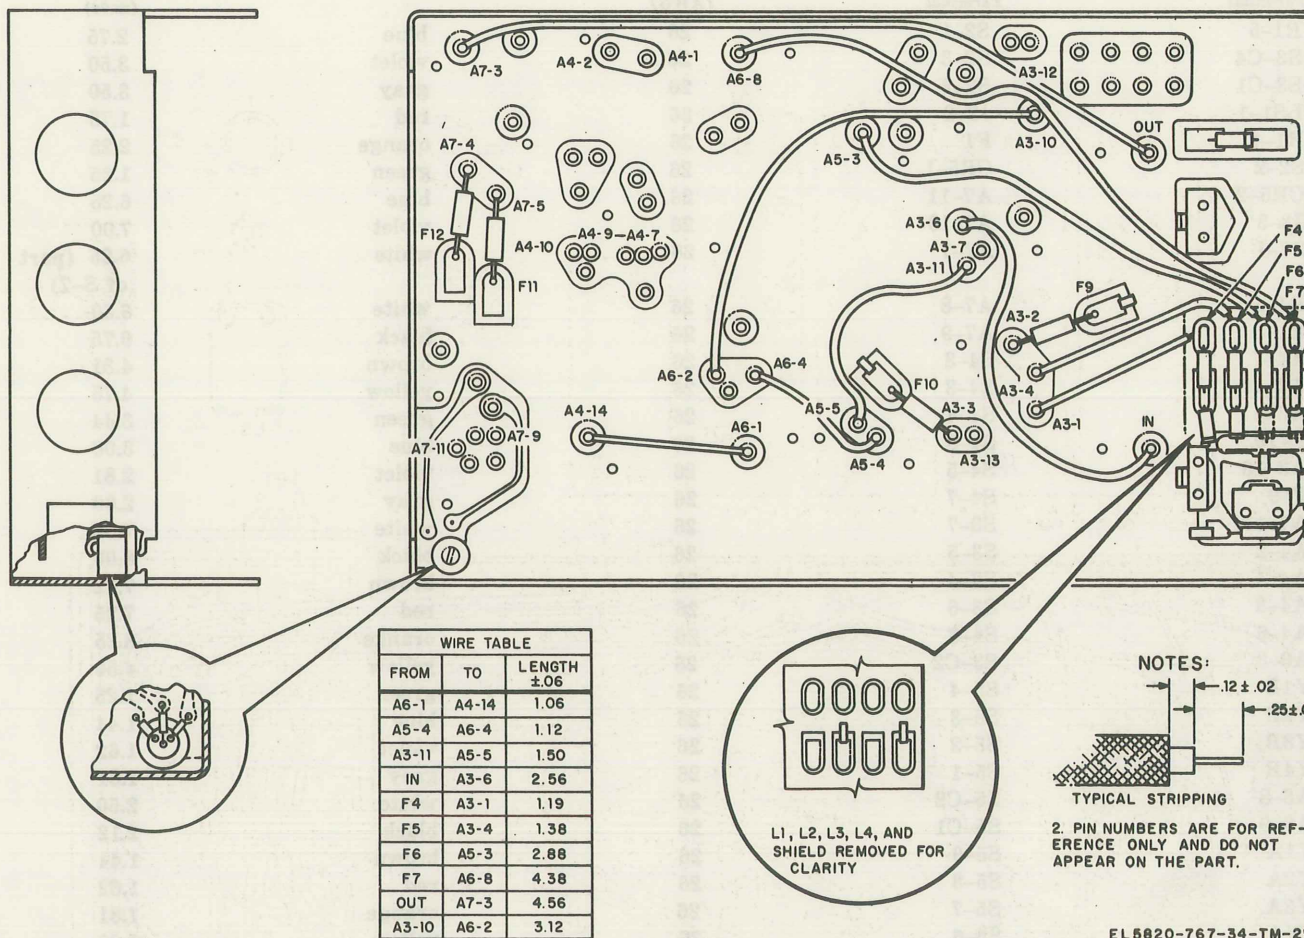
Chassis and Frame Assembly, coaxial wire location.
